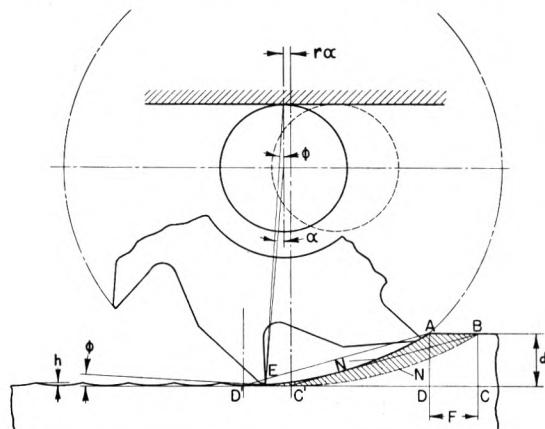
ANGLE OF APPROACH OF A MILLING-CUTTER TOOTH
